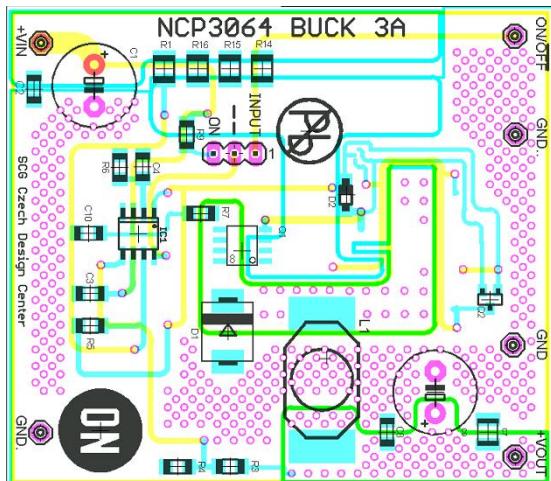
Buck Demoboard with External PMOS Transistor Layout
